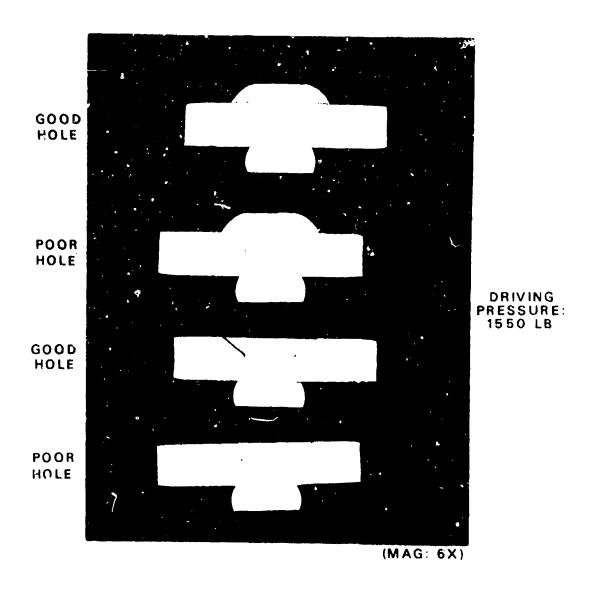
Photomacrographs of Sectioned 3/32-in. Diameter (D) 7050-T7X Rivets Driven With 1.5D Flat Heads in 0.090-in. 2024-T3 Sheet
